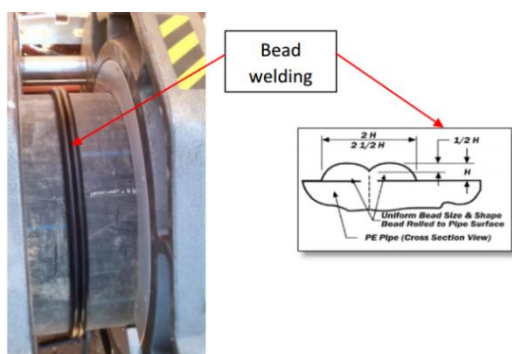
Formation of bead welding according to ASTM standard F2620-01[13].
